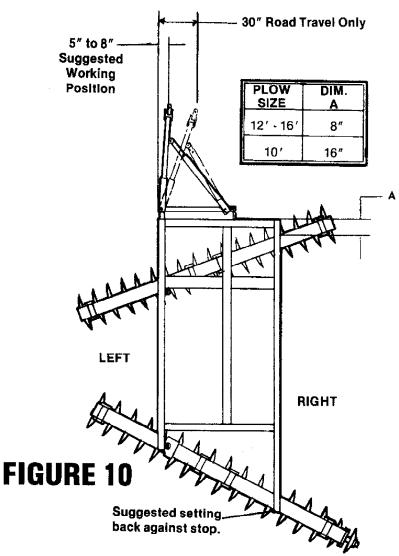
shows the gang sections at a suggested angle position for most soil conditions. This setting would be for heavy cutting. Too much front gang angle can cause the rear of the machine to trail to the left. Too much rear gang angle without sufficient front gang angle will cause the rear of the machine to trail to the right.
